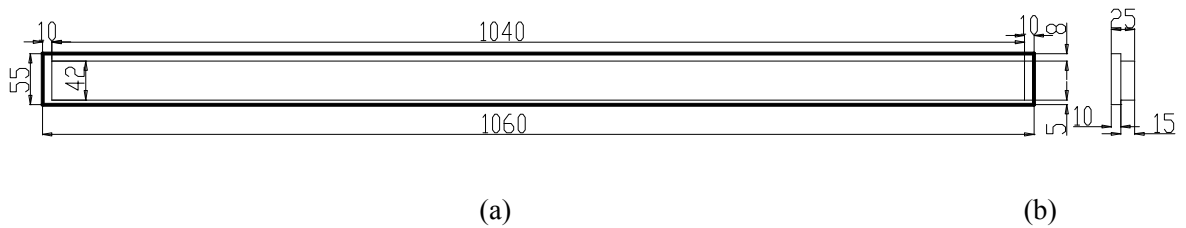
(a) Detailed plan view of the upper and lower Perspex walls (b) Detailed side view of the upper and lower Perspex walls
